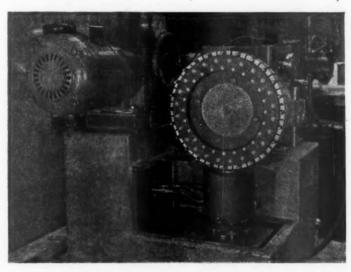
Automatic handling mechanism for local hardening of small knifeedges. Guards removed to show work-head transformer.
